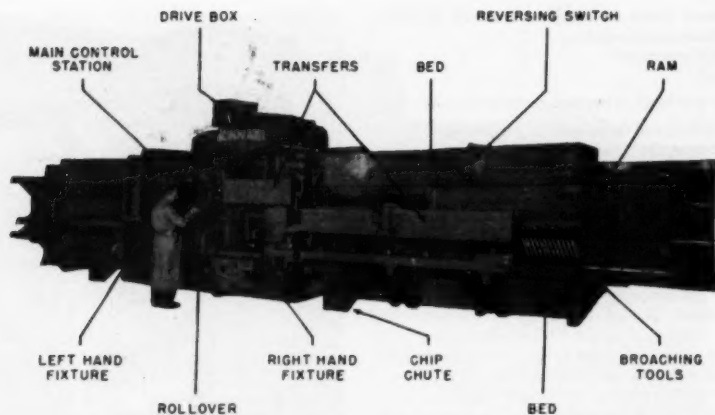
HORIZONTAL TWO-WAY BROACHING MACHINE FOR CYLINDER HEADS
